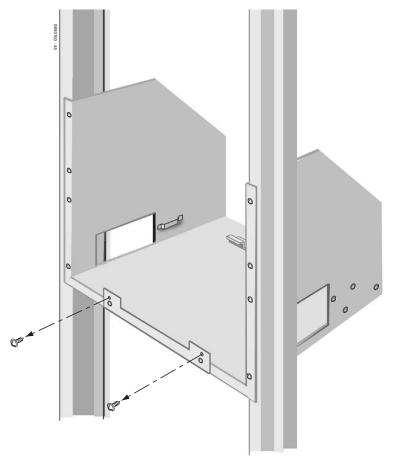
REMOVE THE SCREWS FROM THE RACK
